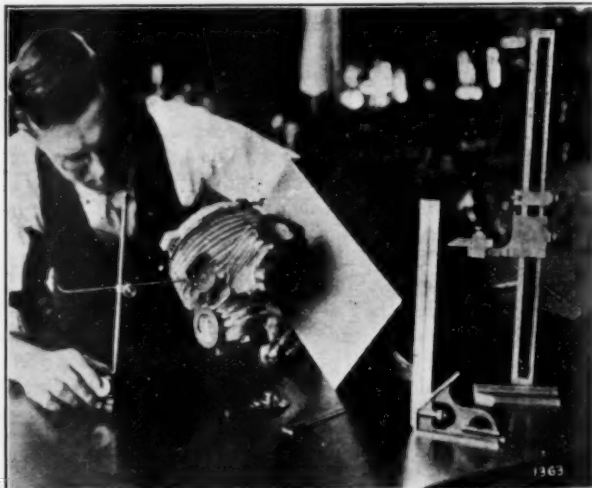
LAYING OUT CYLINDER-HEAD CASTING TO INSURE BOSS DIAMETERS AND WALL THICKNESS MEET DRAWING DIMENSIONS
